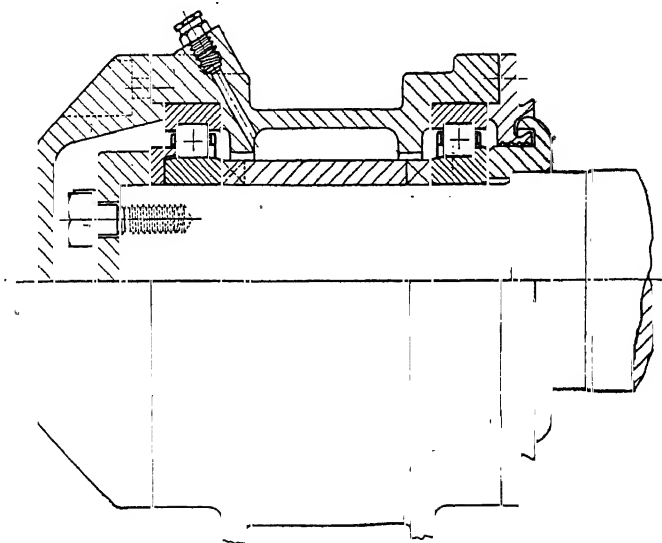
An axle-box arrangement designed for easy dismantling.
